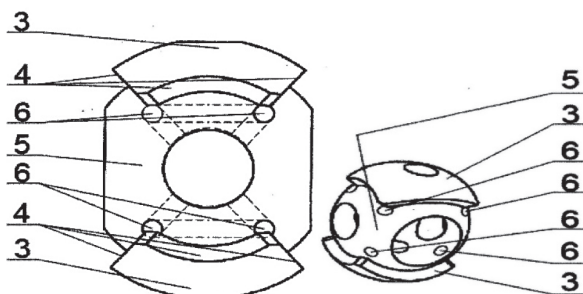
Front view of the spherical hollow body design (left) and an axonometric view (right), 3 – spherical plate, 4 – specially shaped surfaces of the spherical plates, 5 – spherical hollow body, 6 – flow channel
